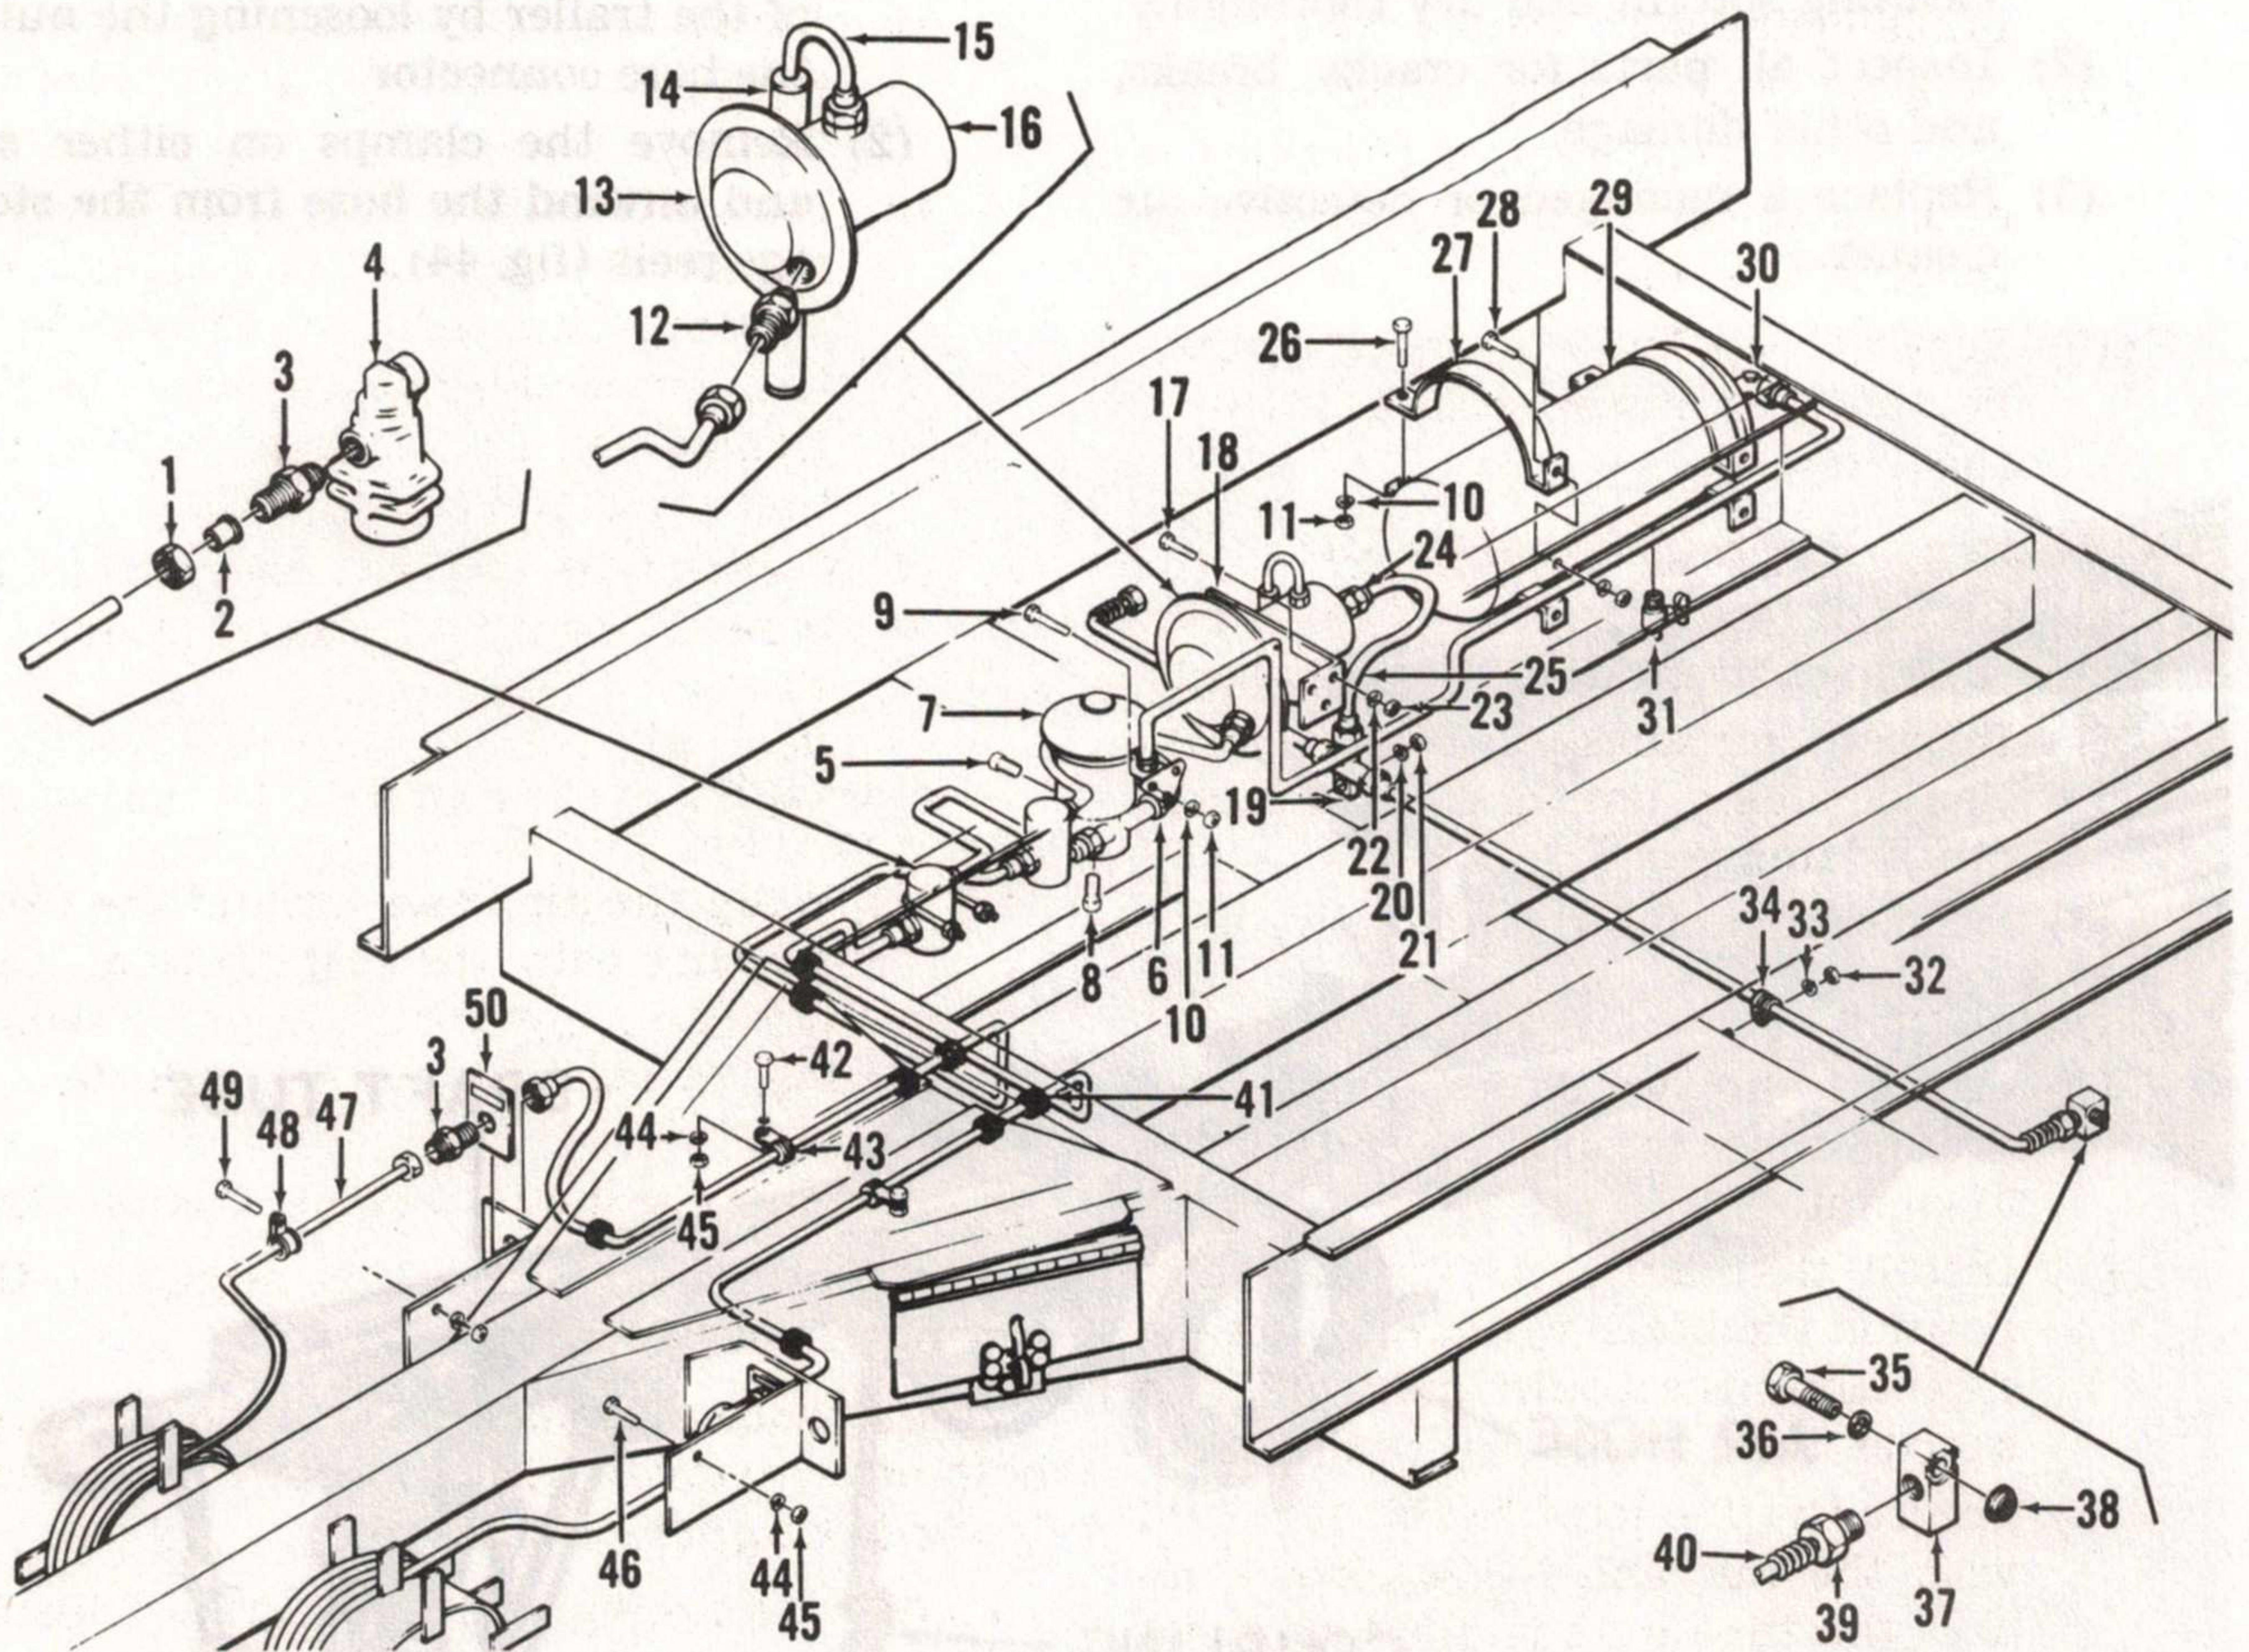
Air hose and coupling, right-hand side, installed view (Model 11).
